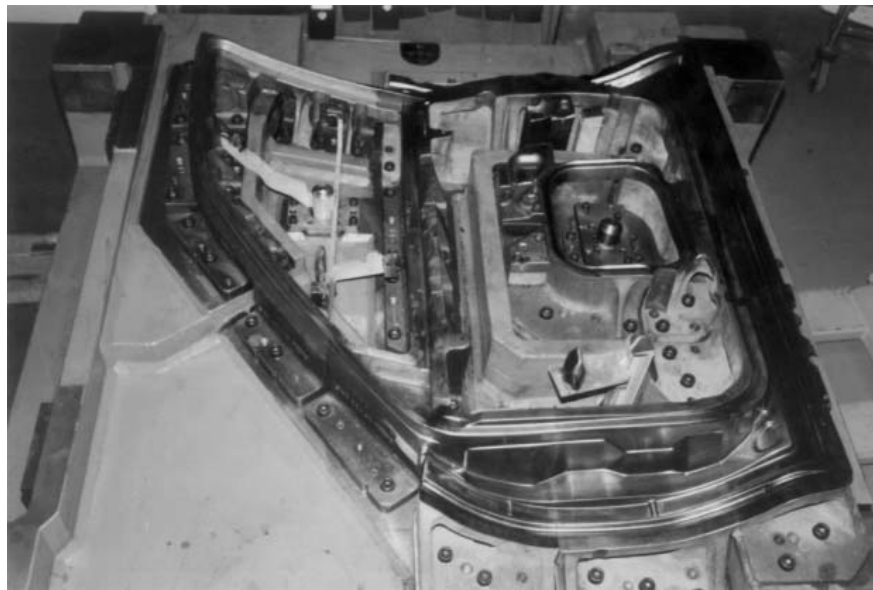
Example of CVD coated steel tool, segmented forming tool for an automobile door. (Courtesy of VST Verschleiss Schutz Technik Keller GmbH & Co. KG, Schopfheim, Germany).
